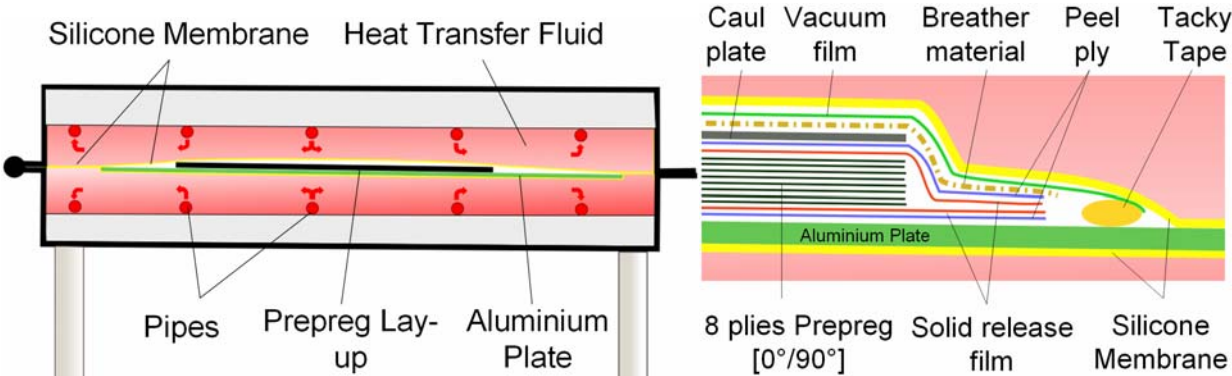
Drawing of the pressure Chamber (left) and schematic Lay-up and vacuum bagging diagram (right)
